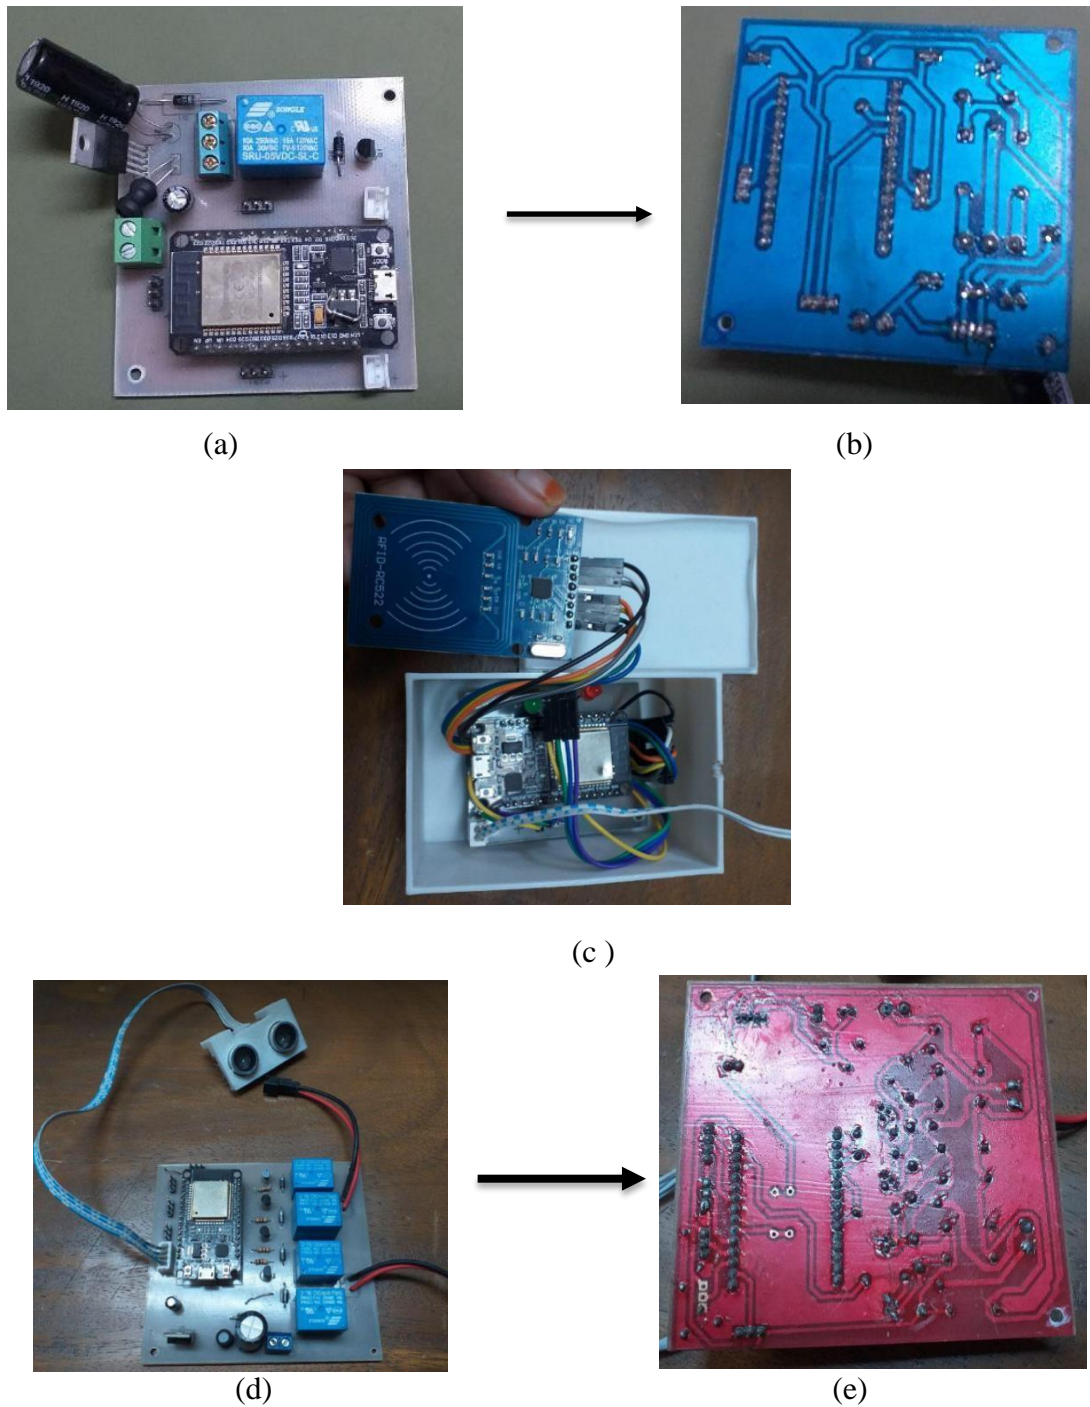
Implementation of PCB boards (a) Implemented PCB Board of PIR sensor (Front) (b) Implemented PCB Board of PIR sensor (Back) (c) Implemented PCB Board of a temperature sensor with RFID (d) Implemented PCB Board of the control board with Ultrasonic sensor (Front) (e) Implemented PCB Board of the control board with Ultrasonic sensor (Back).
